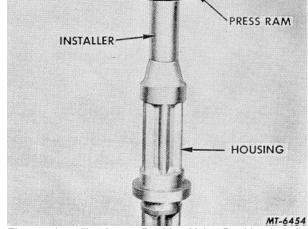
Installing Lower Bushing Using Bushing Installer SE-1955-8
